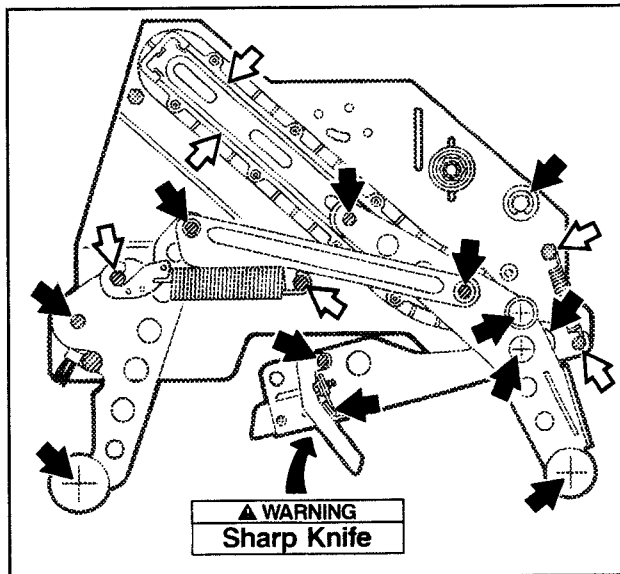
Lubrication Points - Upper and Lower Taping Heads
